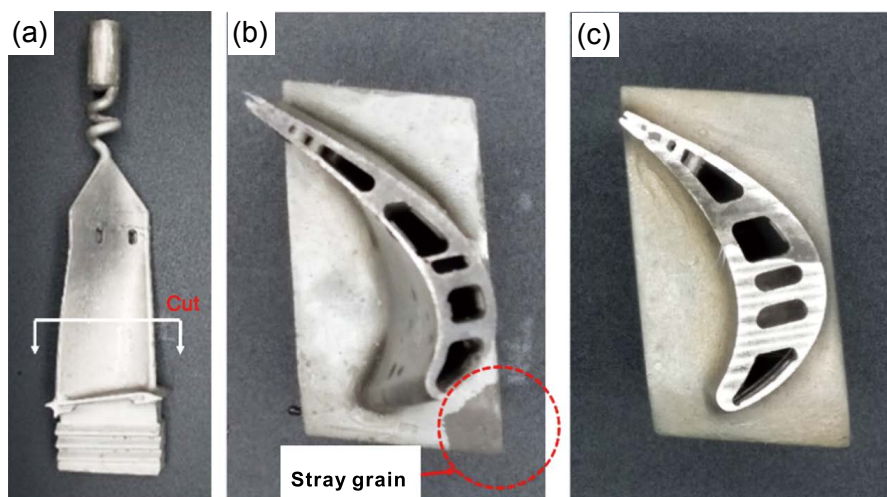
Picture of blade casting showing the location of cutting (a), and section view of blade casting with traditional (b) and improved (c) moulds
